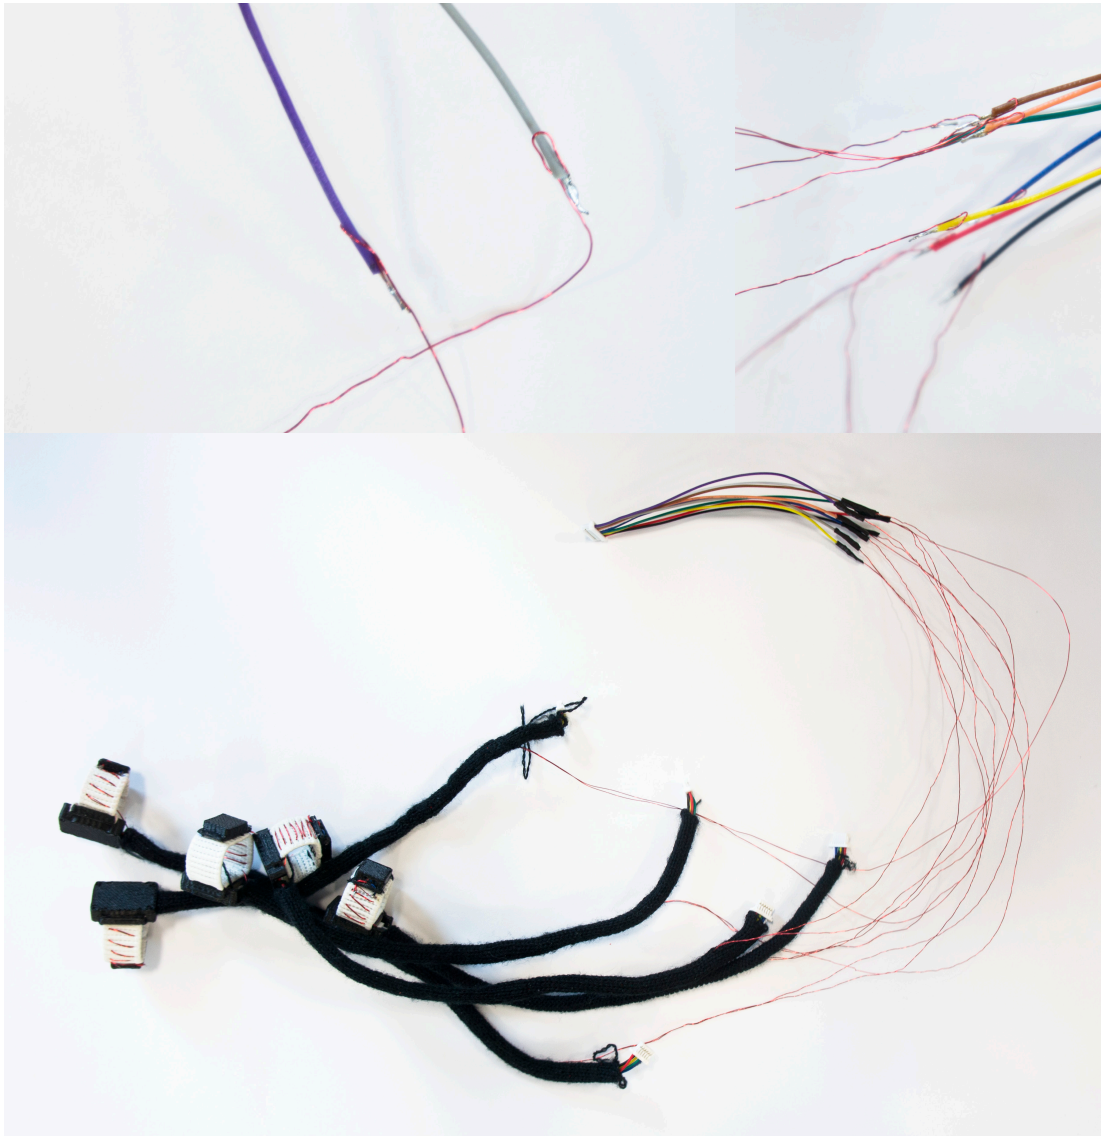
Connecting haptic motor wires to the connector plug for the main board. Thin enamelled wires were soldered to thicker wires and looped around the insulation before being covered by heat shrink.
